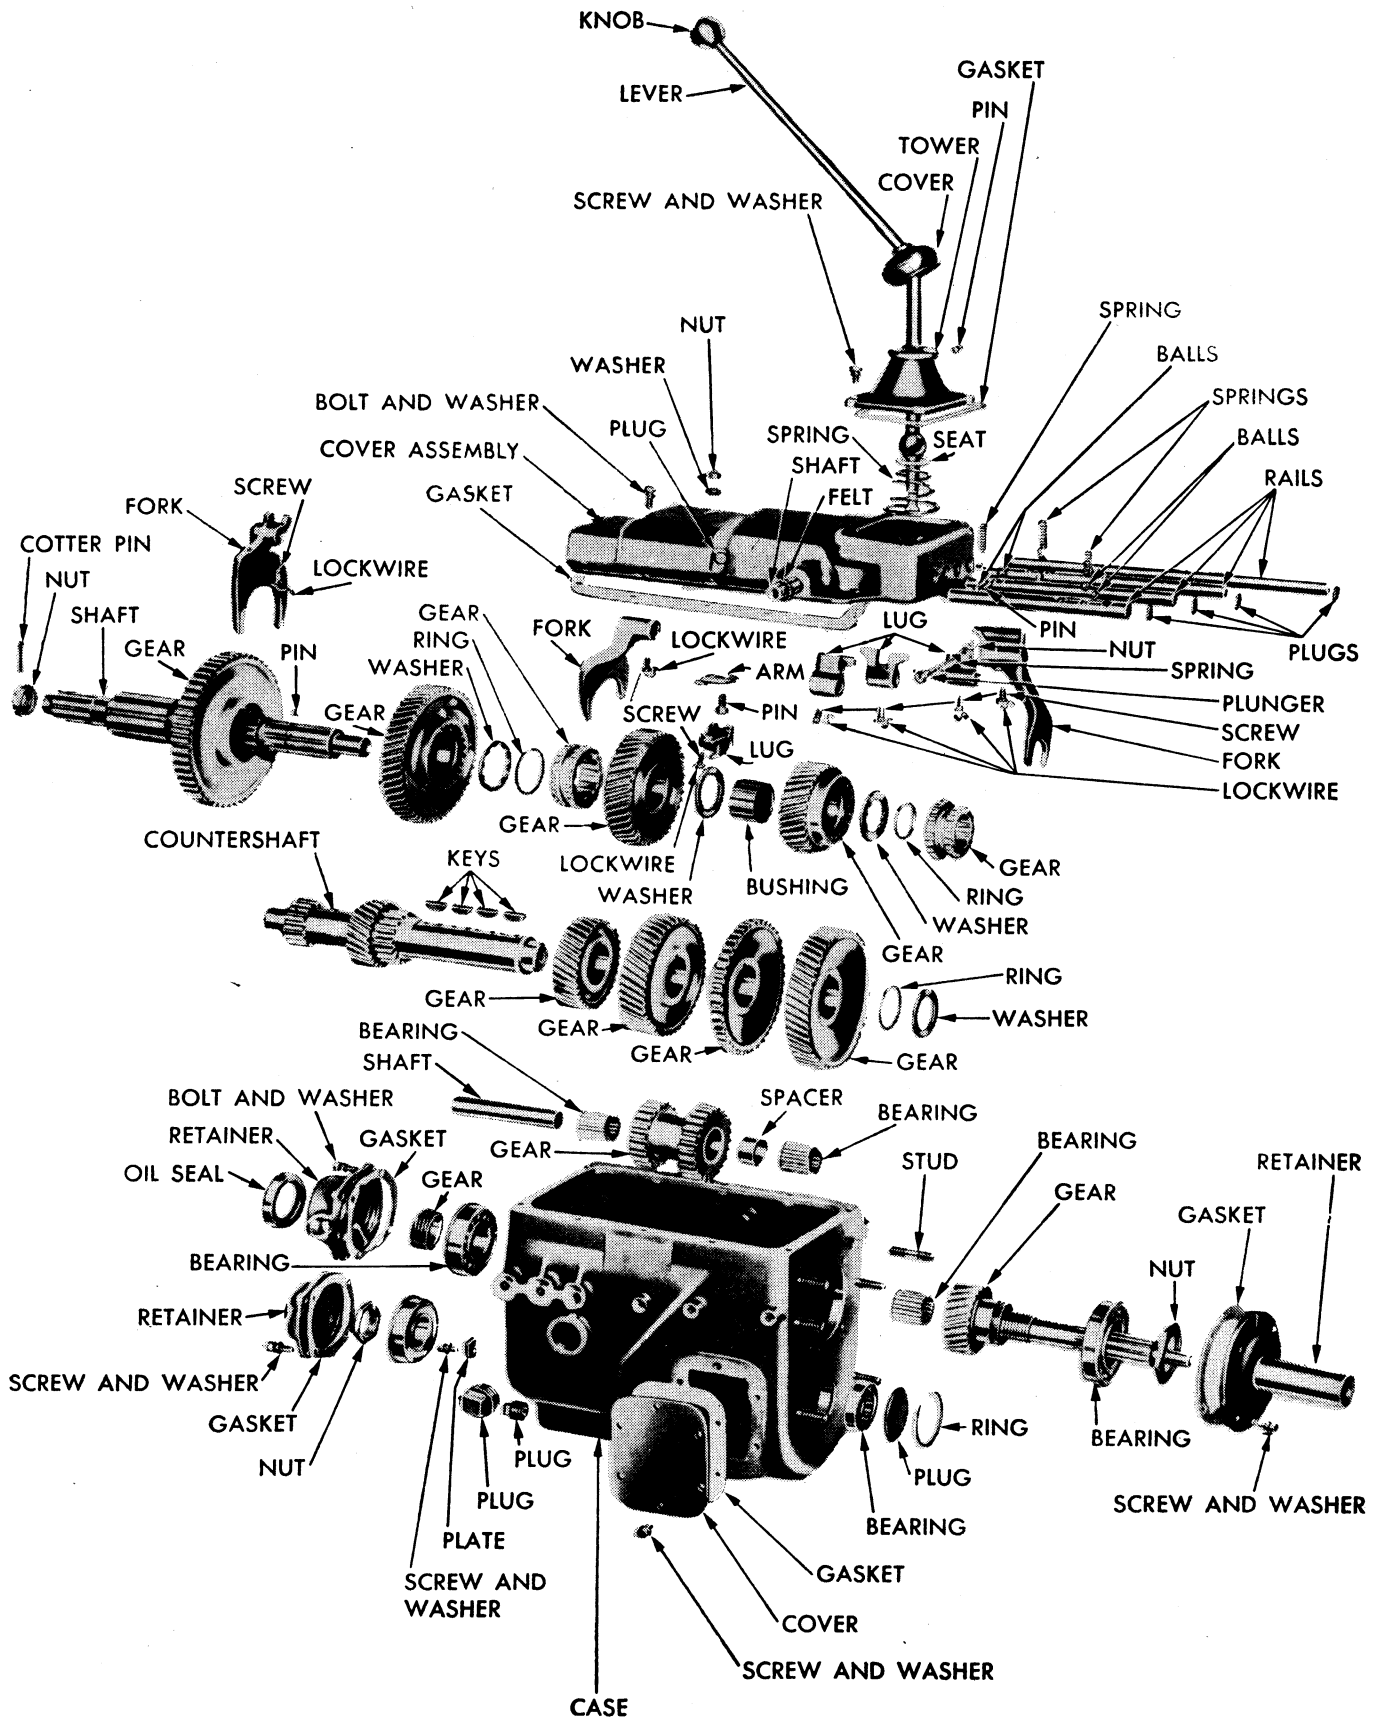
Clark five speed transmission. Models 290, 291, 292
